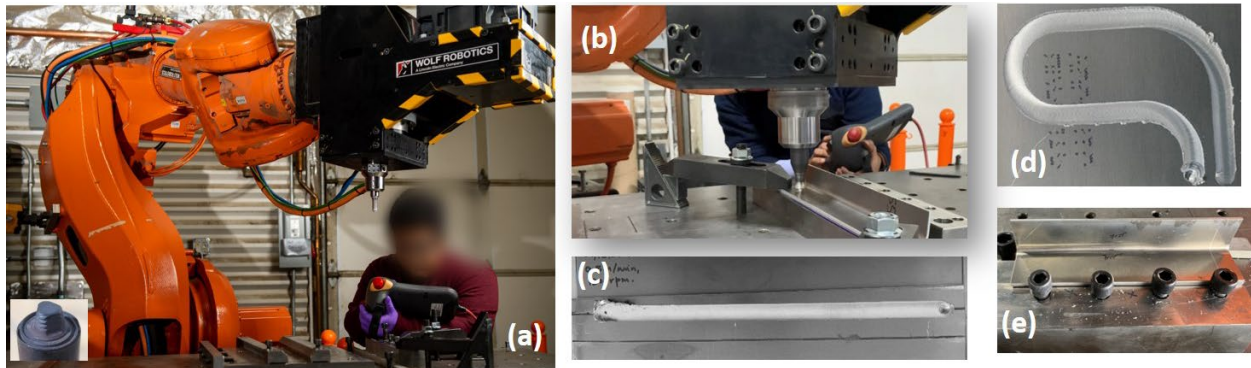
(a) Robotic platform (inset: the baseline tool). (b) T-peel sample welding. (c) Linear lap weld. (d) Curve weld. (e) Clamping scheme for the T-peel sample. Source: PNNL.
